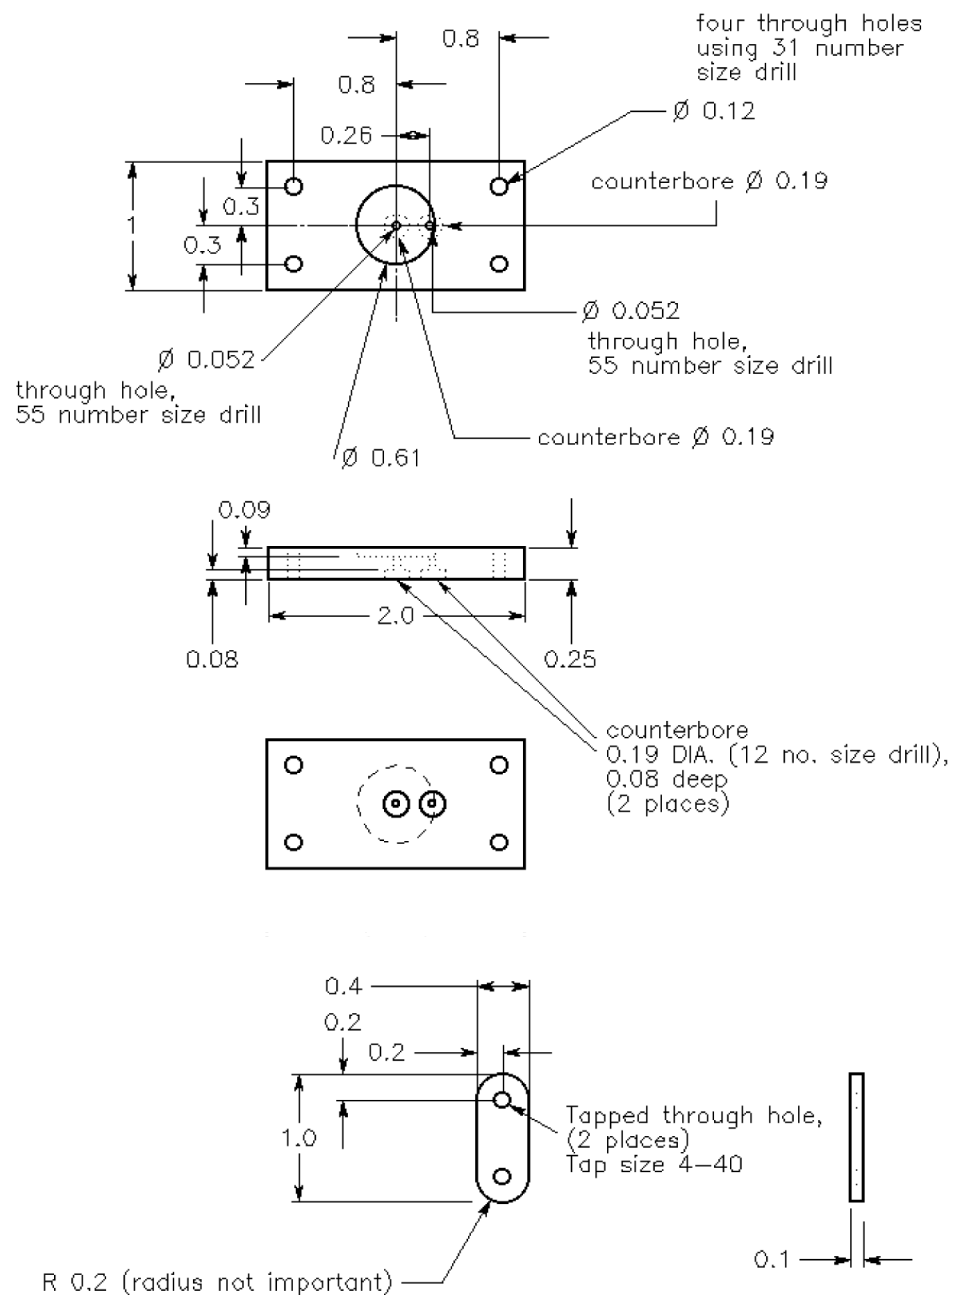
The Macor™ heater holder (top). The heater coil is placed in the circular well cut into the heater holder and faces the back plate. The screw plates (bottom) secure the heater holder to the lens. The screw plate material is 304 stainless steel. All dimensions are in inches.
